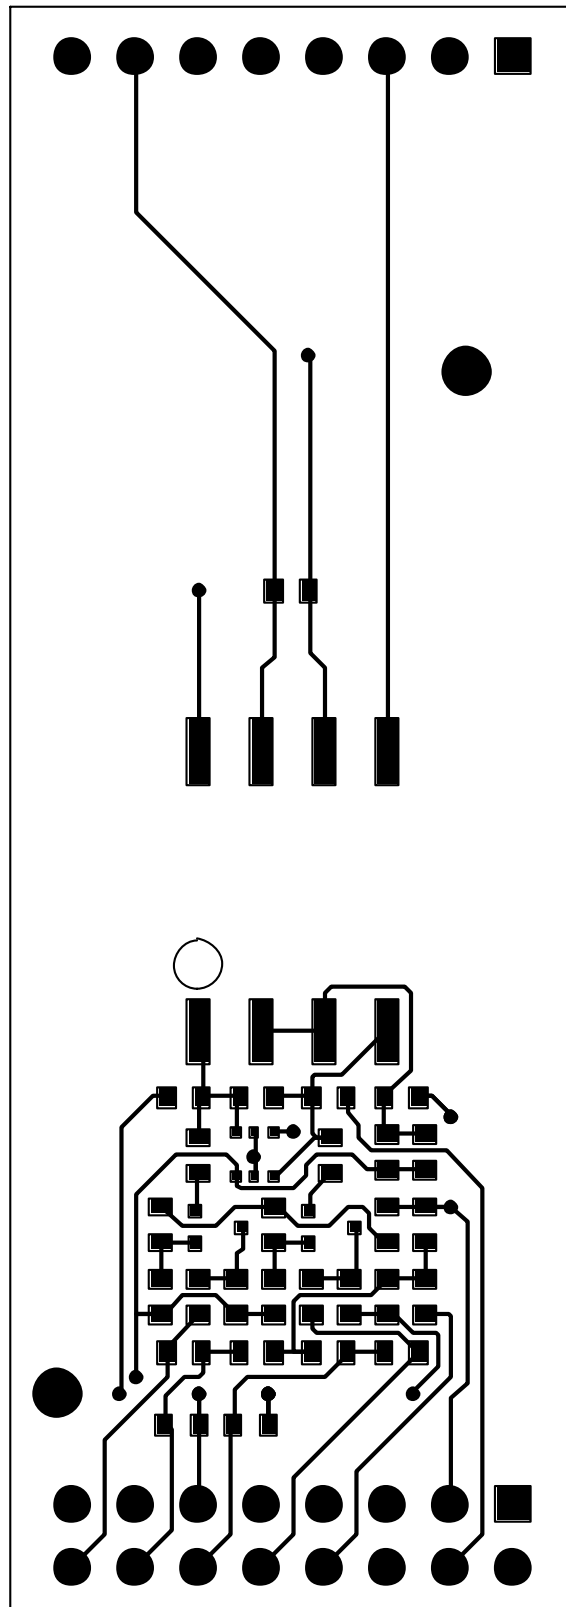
U_p Port Line Interface Subassembly board (top side traces)
